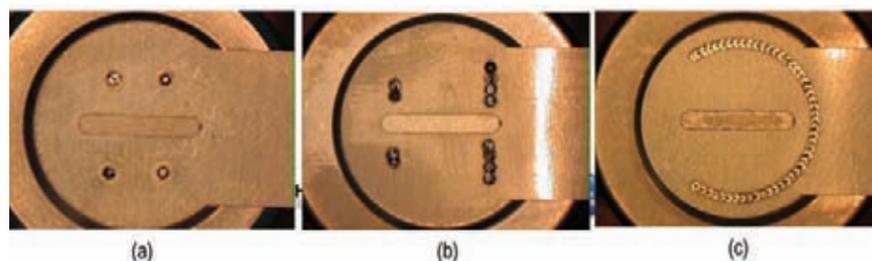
Examples of flexible weld placement for tailoring weld strength and weld
